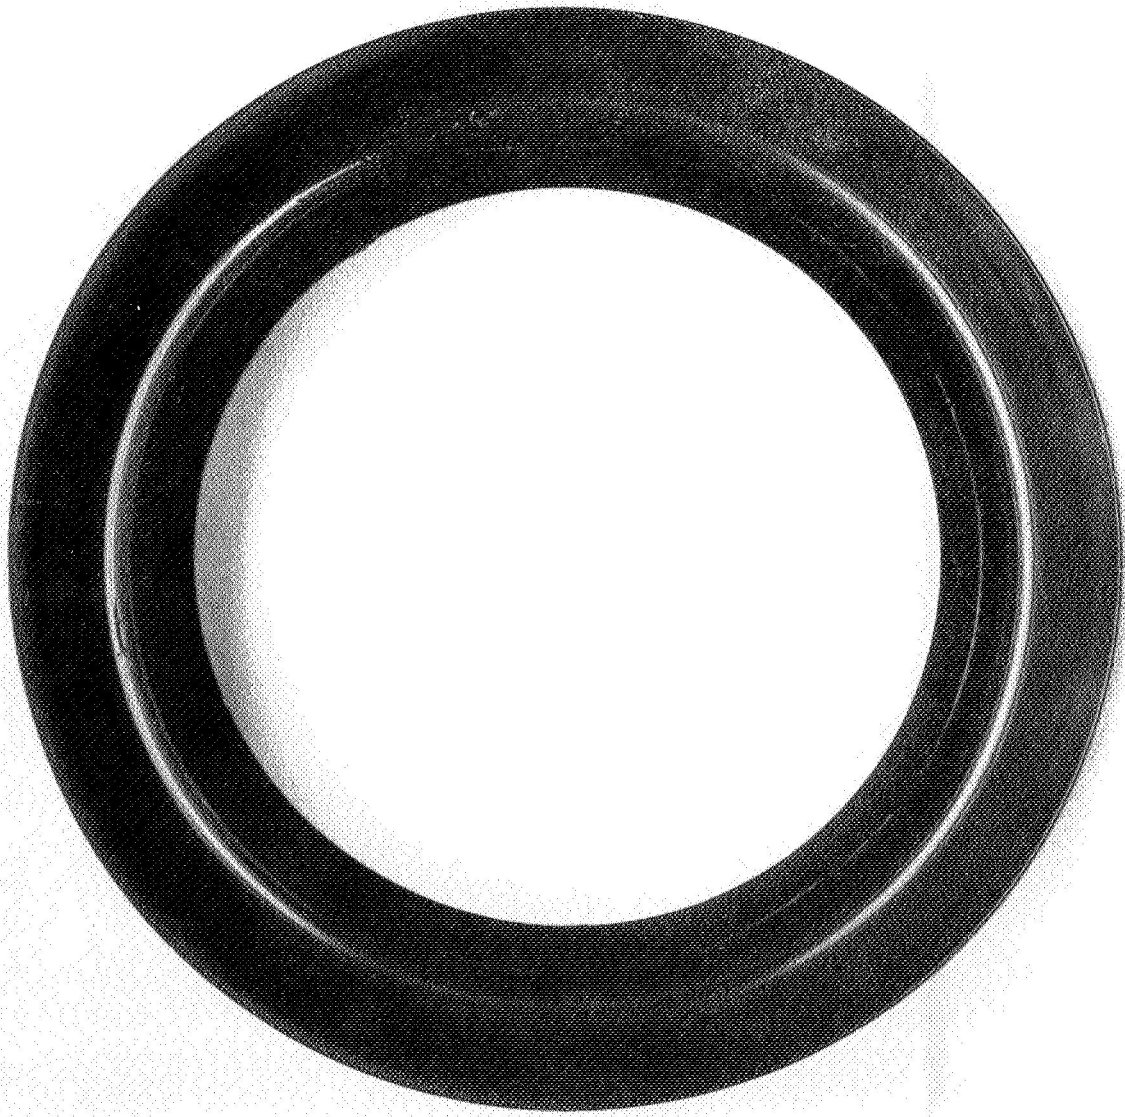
45° V-Seal, 1300 Hours of Testing (No. 3 Seal - Outboard)
